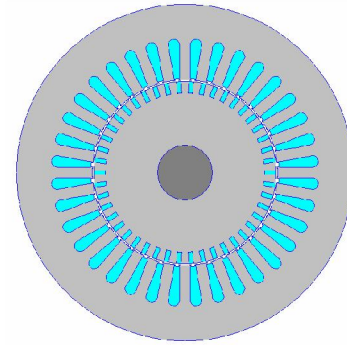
Cross-sectional view of 5-hp reconfigurable motor.
